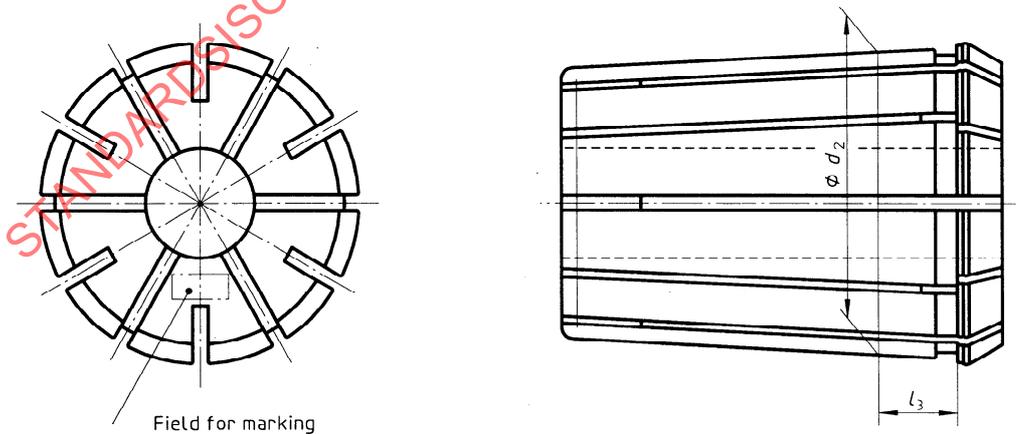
Collet form A, unilaterally slotted, with short clamping bore for cylindrical shanks
